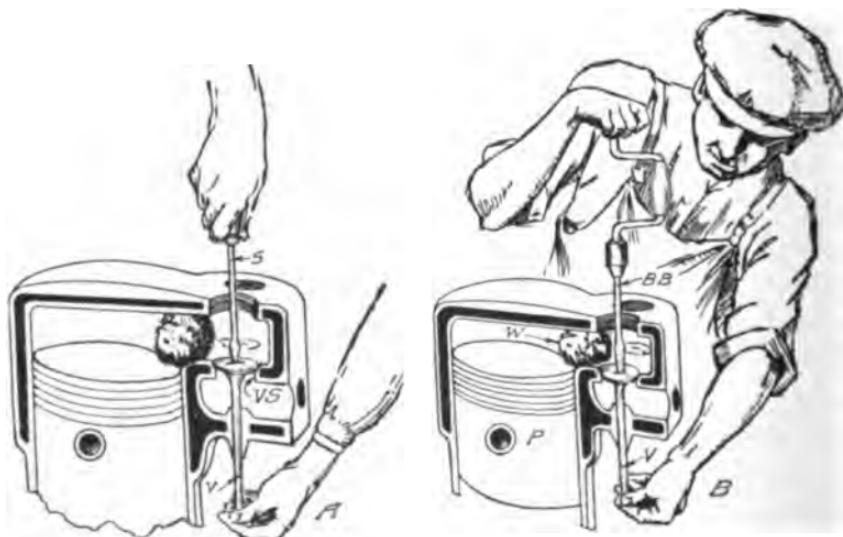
Two Methods of Grinding-In Valves: (A) by Hand, Using a Screwdriver; (B) with Brace, Screwdriver and Bit
